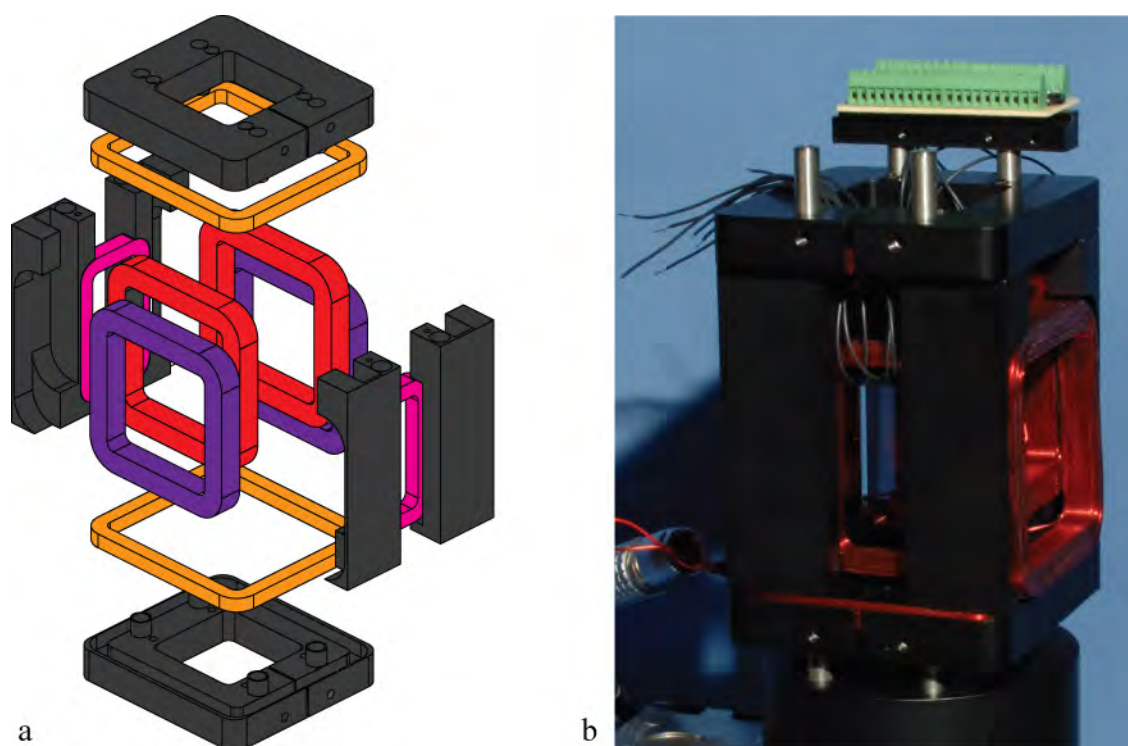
(Color). V2 coil assembly. (a) exploded view of the assembly showing all four coil pairs. (b) Coil assembly shown in place around a cell. The green connector header shown at the top of the page is the break-out assembly for connecting to the atom chip.
